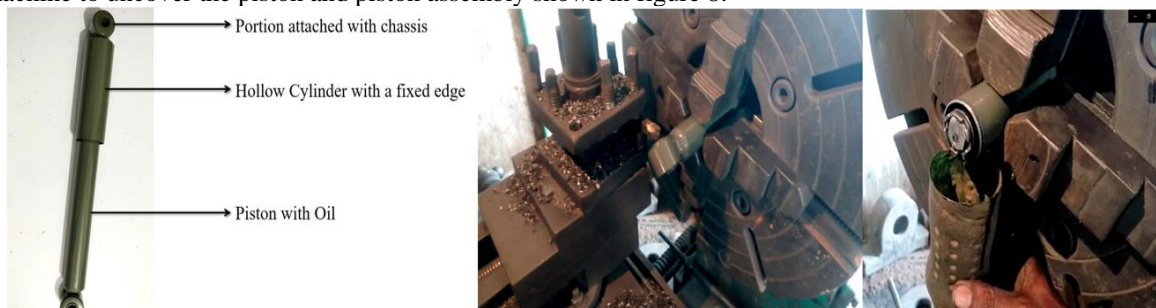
A Chassis Shock Absorber (Left), Machining of Shock Absorber and Collection of fluid (Left)
